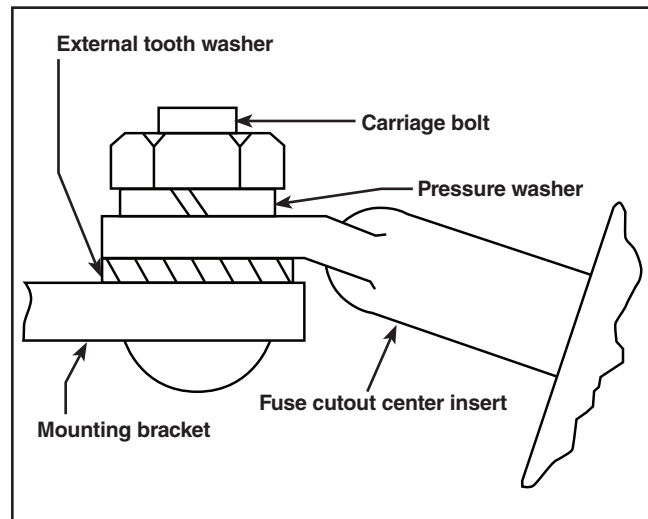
Detail of attachment of Three-Shot Type XS Fuse Cutout to mounting bracket.
